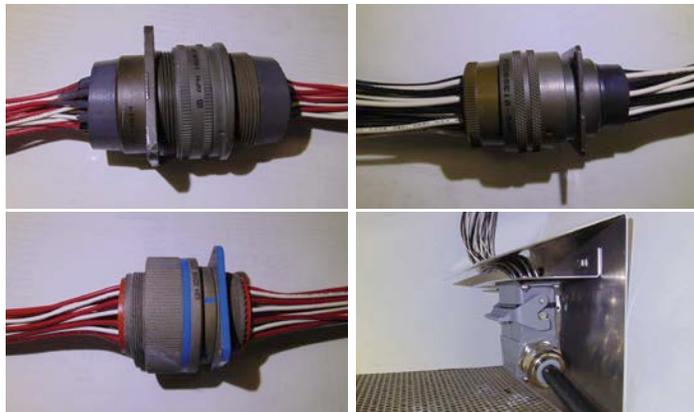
Preparation of test samples. Upper left: Threaded circular SAE 5015 connector. Upper right: Bayonet circular M26482/SI connector. Lower Left: Breech coupling D38999/IV connector. Lower right: Rectangular lever lock DIN connector.
